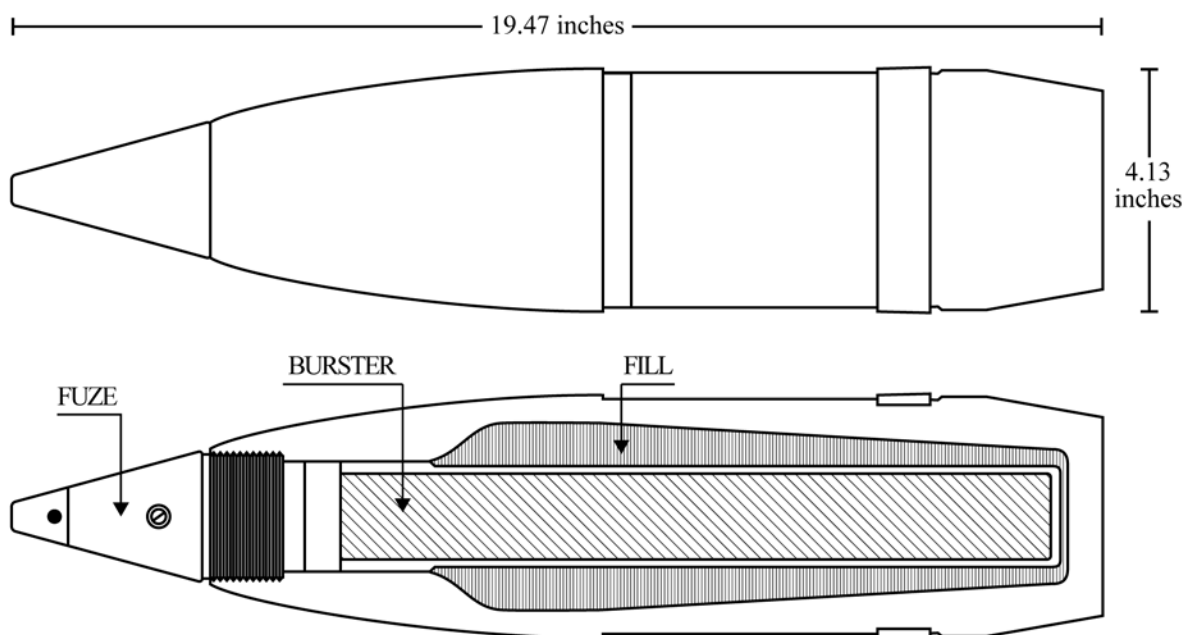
Projectile, 105-mm, Howitzer, M360 (T173) - Line Drawing
